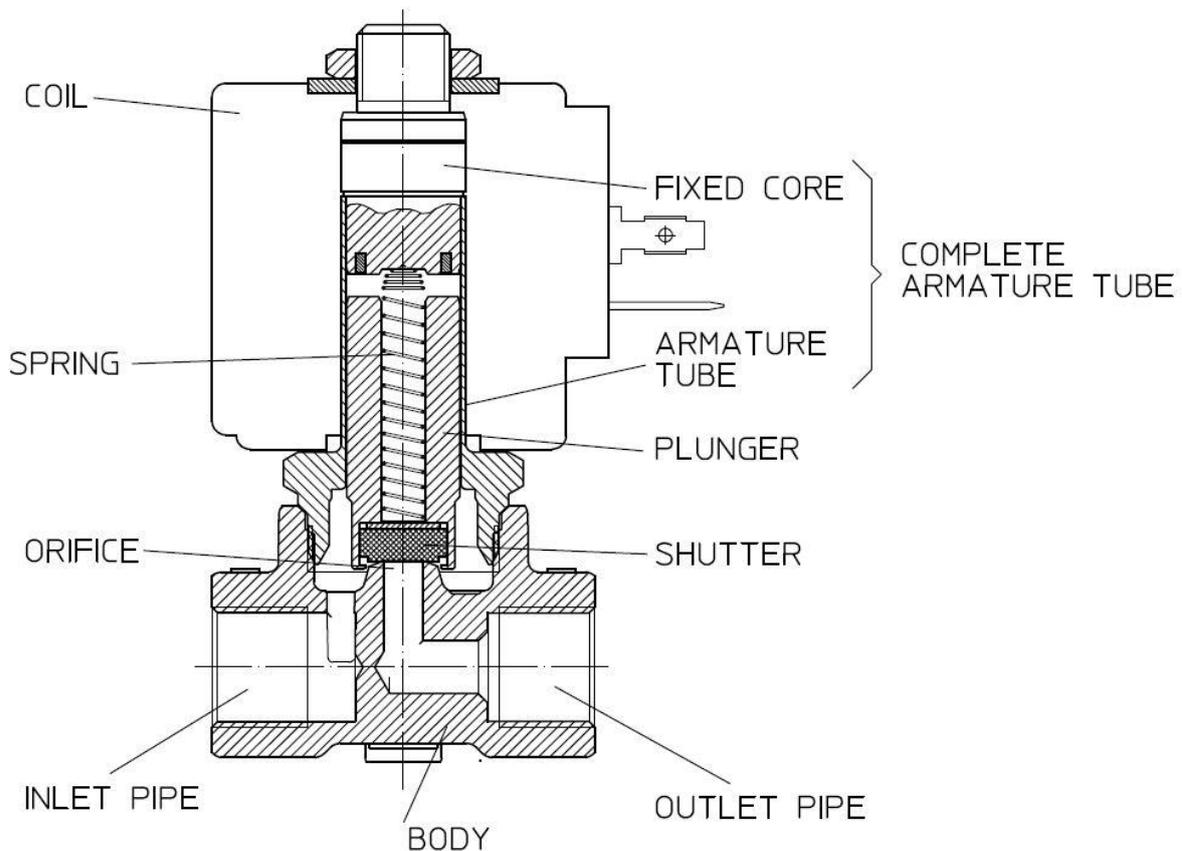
View of a section of the solenoid valve with the indication of main components
